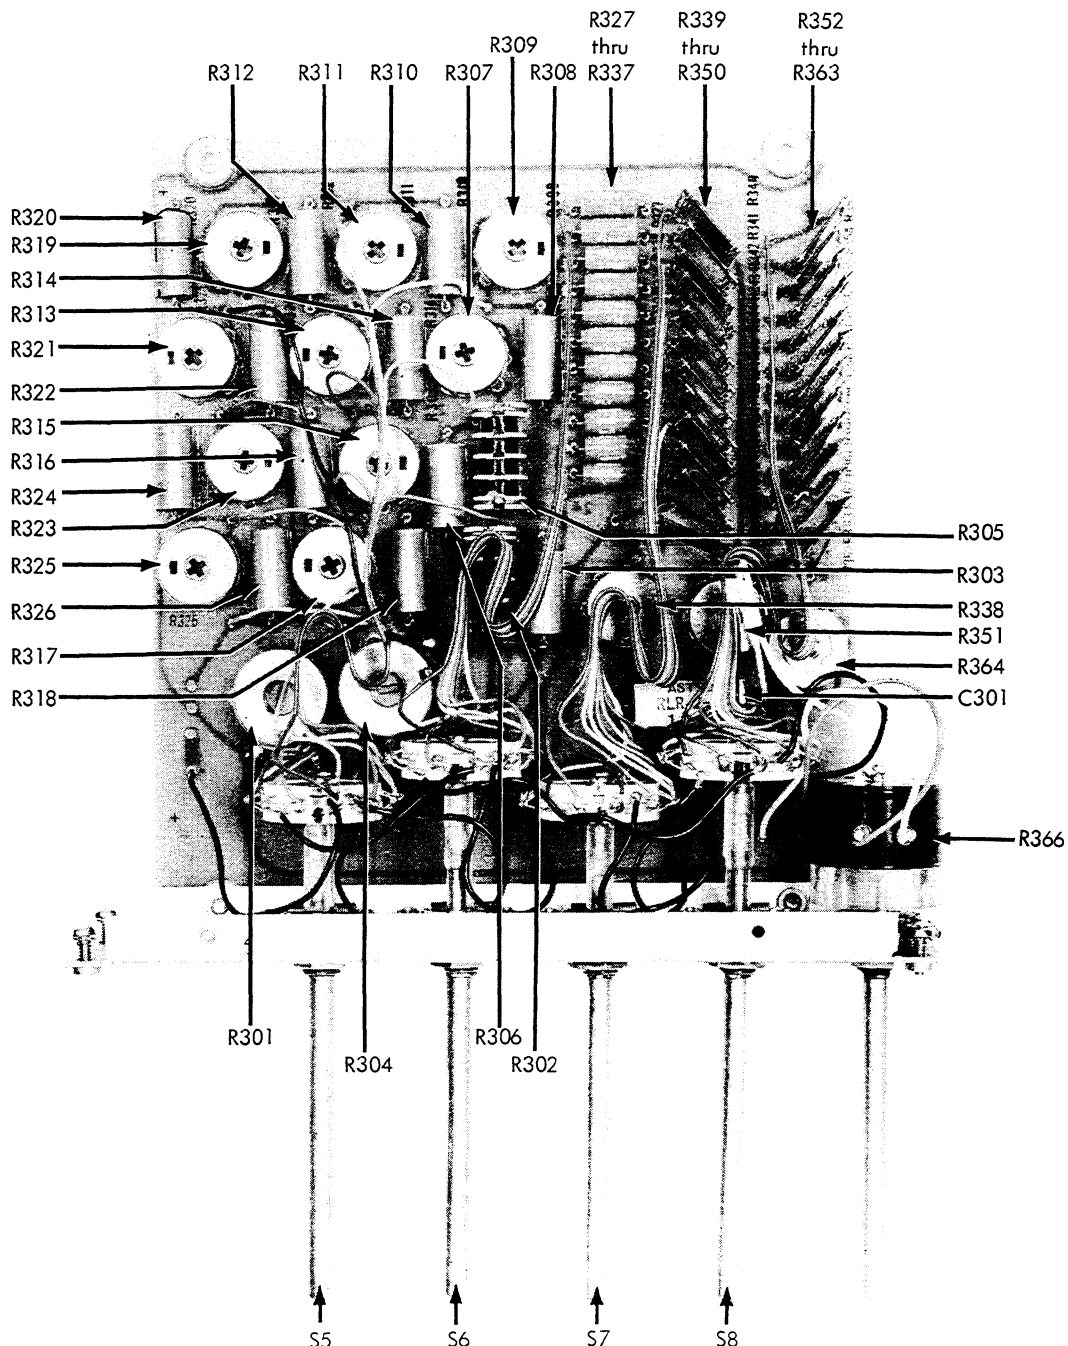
KELVIN-VARLEY ASSEMBLY
